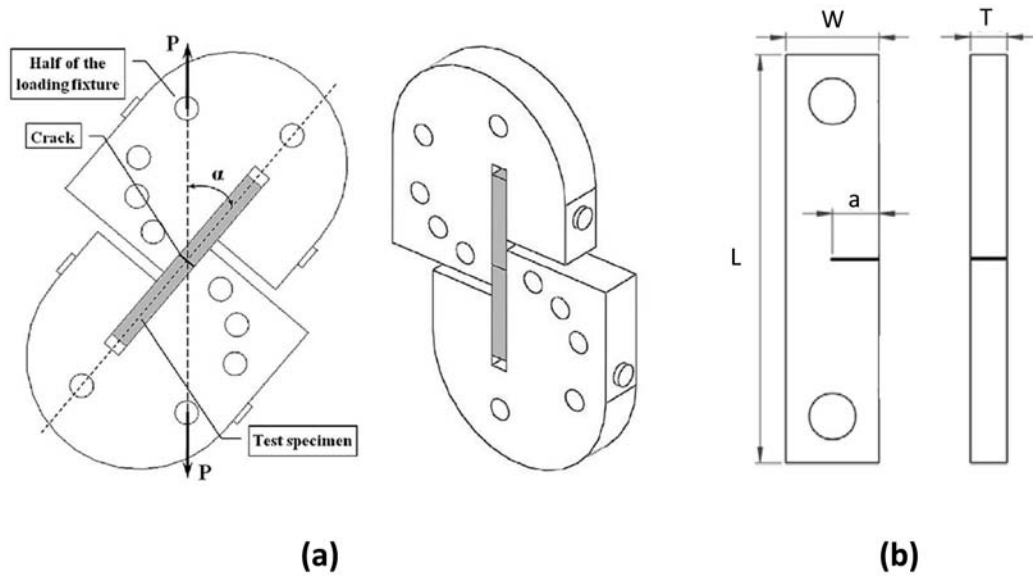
Scheme of the experimental fixture introduced by Ayatollahi and Saboori [40] (a) and the cracked specimen with dimensions $L \times W \times T$ (b).
